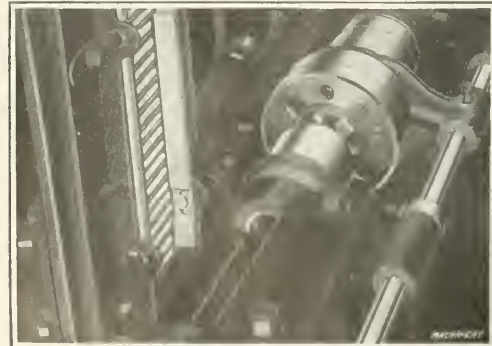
Close View of Die and Magazine Feed on Machine shown in Fig. 3
